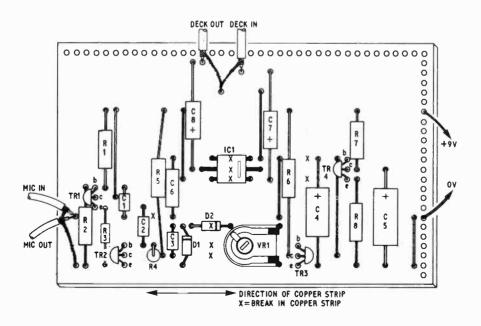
Component layout and 0.1 in track Veroboard cutting details
